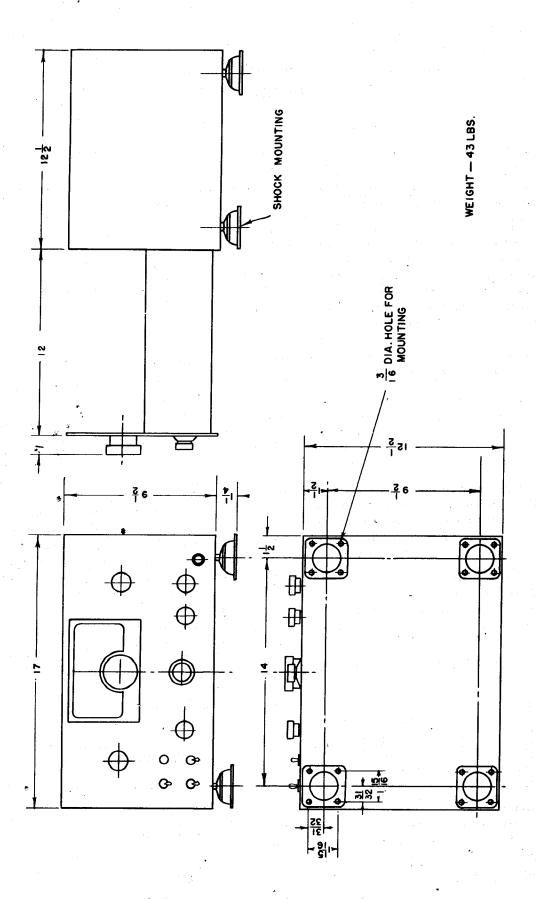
Radio Receiver 128-AY, Outline Dimensional Drawing.
